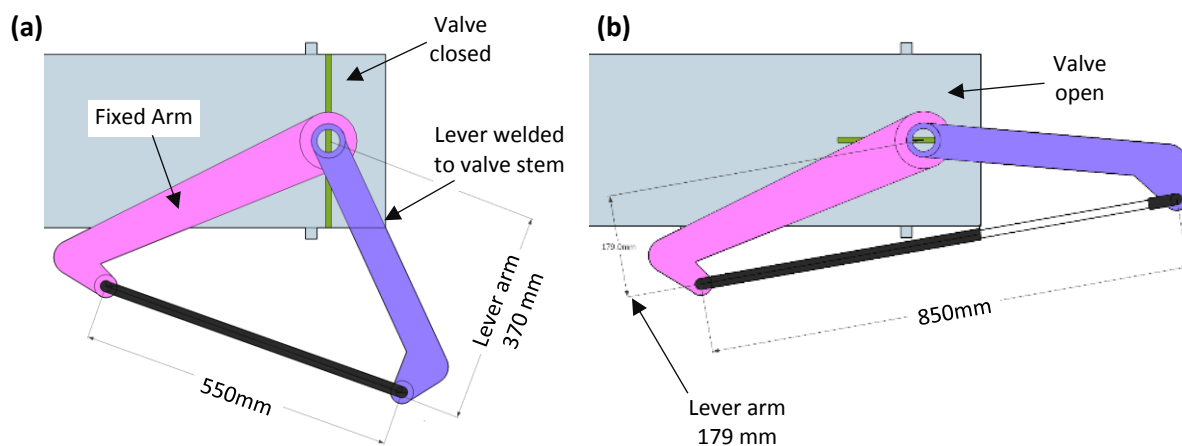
Actuator lever prototype dimensions and lever arm lengths when (a) closed and (b) open
